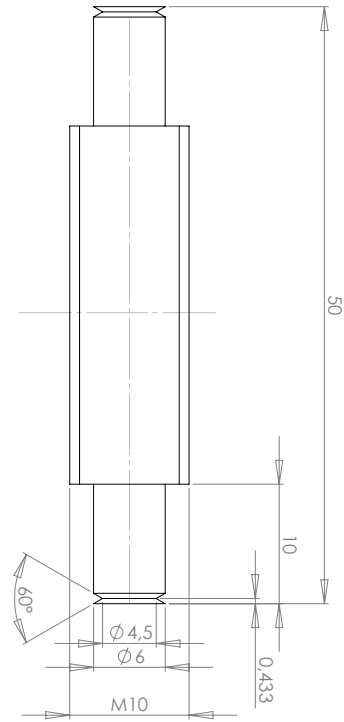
Technical drawing for fabrication of threaded bases for the sensors. The thread is for mounting purposes, and the grooves are for coil mounting.
